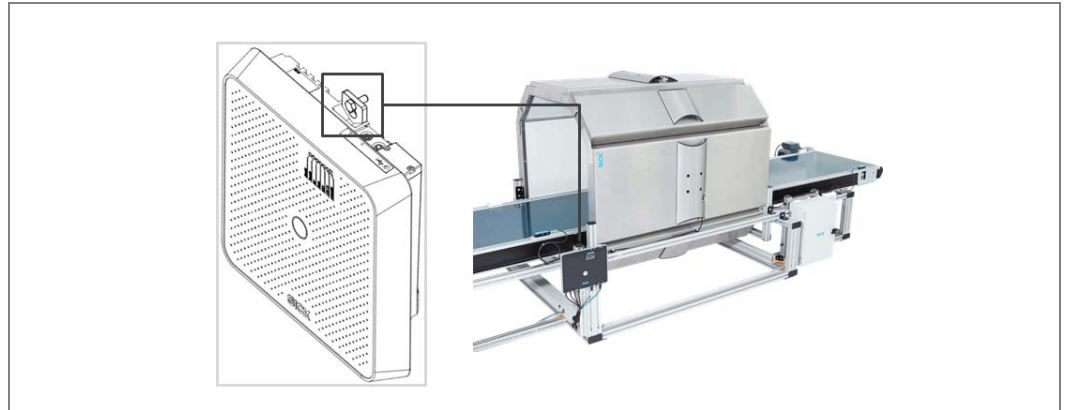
Mounting the read/write device, together with the mounting set, on the conveying system
